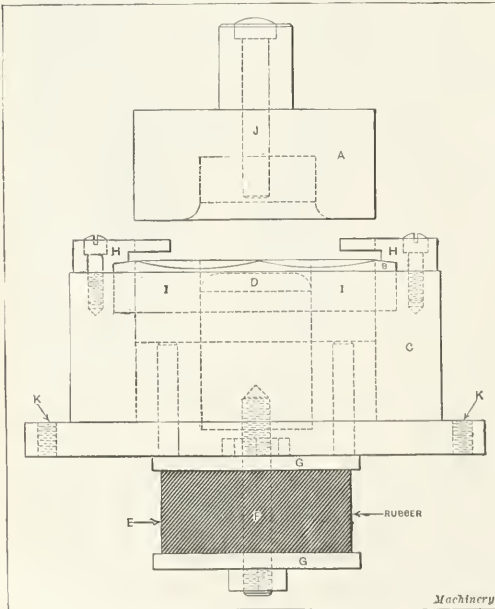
Compound Blanking and Drawing Die in which First Operation is performed
